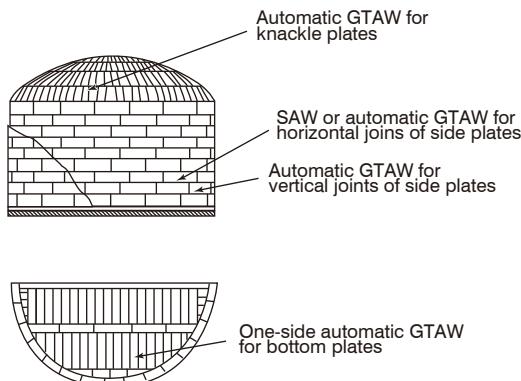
Typical applications of automatic welding processes for a LNG storage tank
